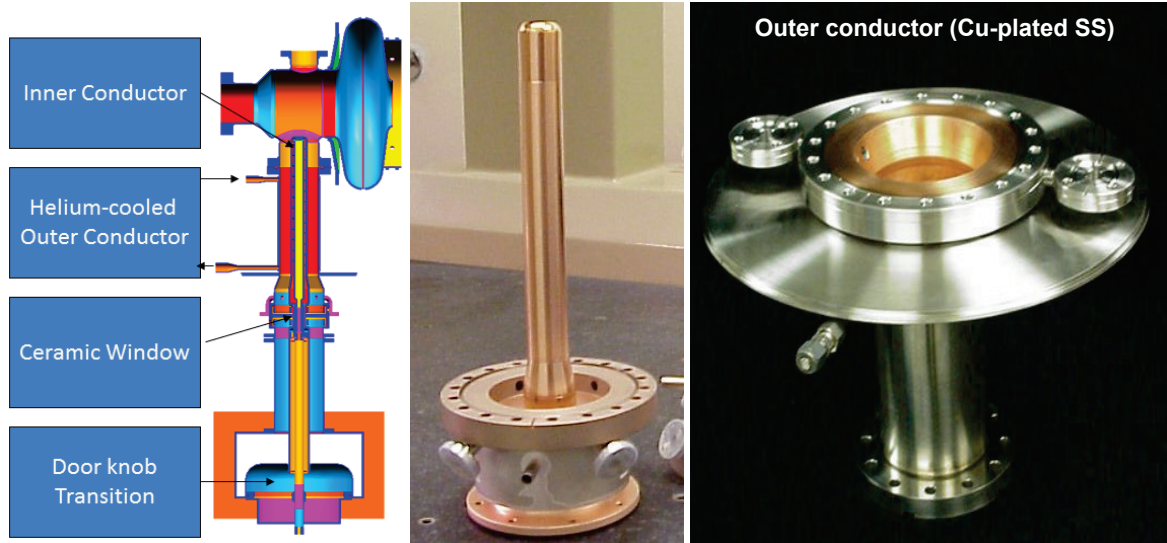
SNS fundamental power coupler (left: schematics, middle: inner conductor assembly, right: outer conductor assembly).
